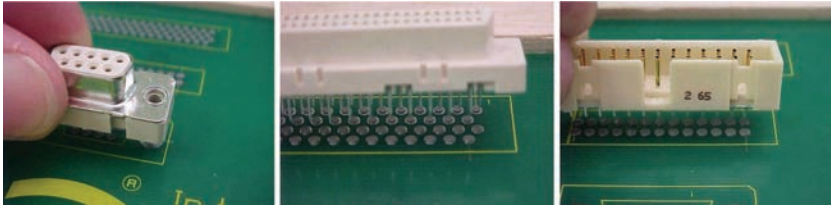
Operator manually placing three different connectors into a test board with no guide, except for the legend on the surface of the board.
